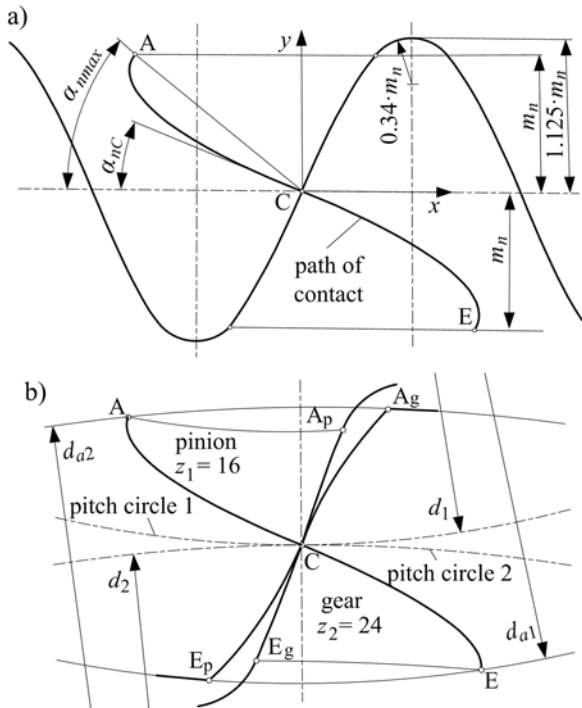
S-gears [7]; a) basic rack tooth profile, and b) tooth flanks of S-gears
